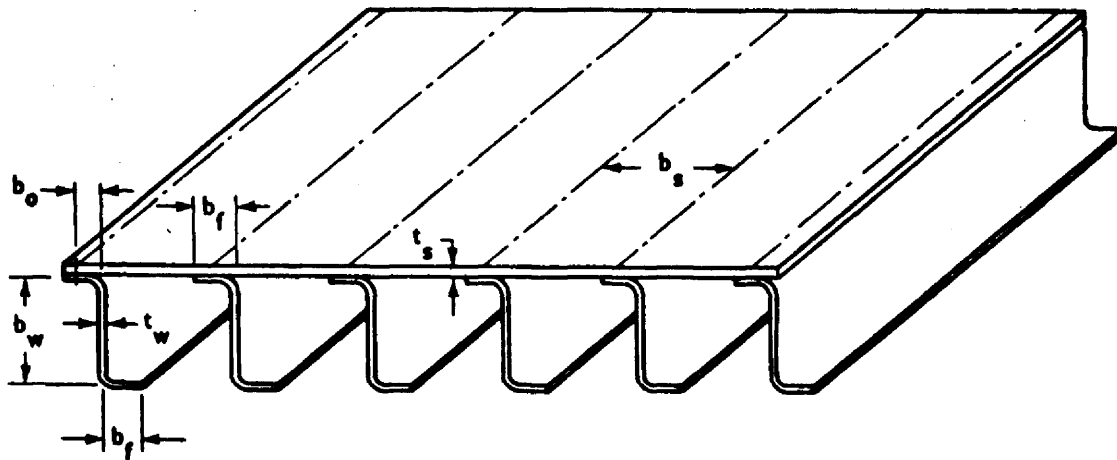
TYPICAL CONVENTIONALLY STIFFENED PANEL.
